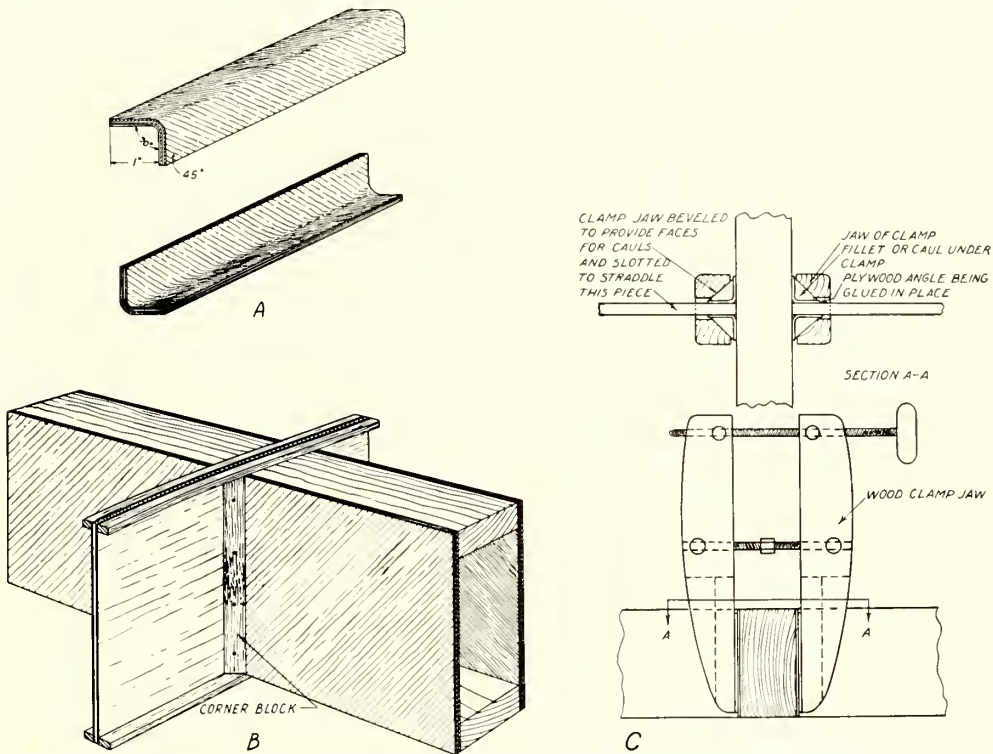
Reinforcements for the joints between the wing ribs and spars: *A*, plywood angles; *B*, triangular, solid-wood blocks; *C*, hand clamp for gluing plywood angles in place.
